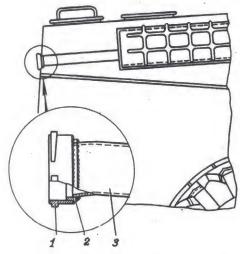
MUFFLER WITH ADAPTER RING 1 — nipple; 2 — adapter ring; 3 — muffler exhaust pipe
